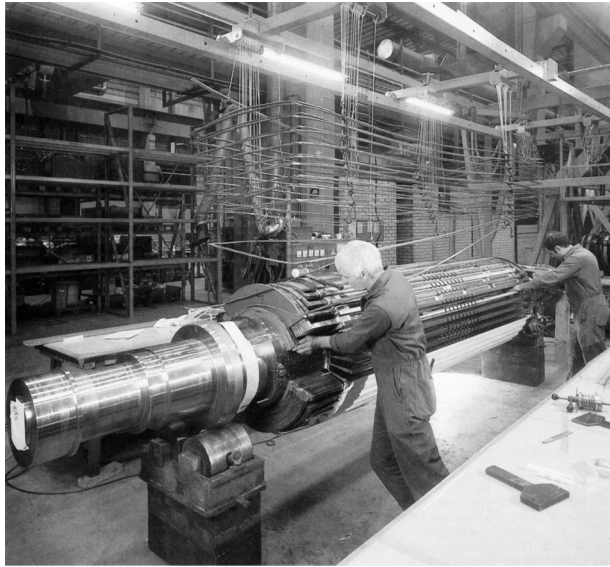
Assembling the rotor. (Source: Alstom Power.)
